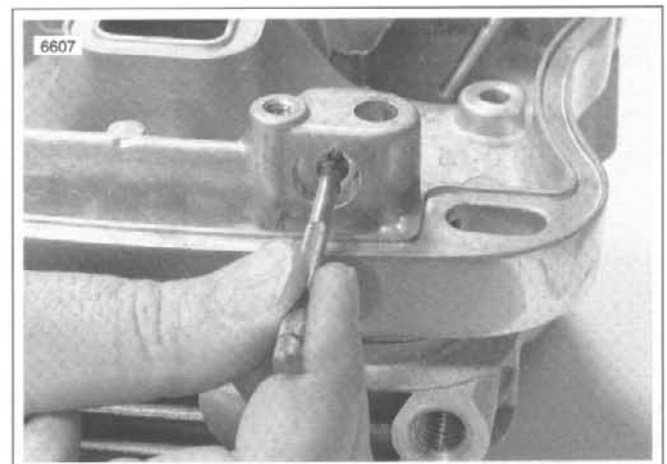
Measuring Rocker Arm Shaft Diameter
